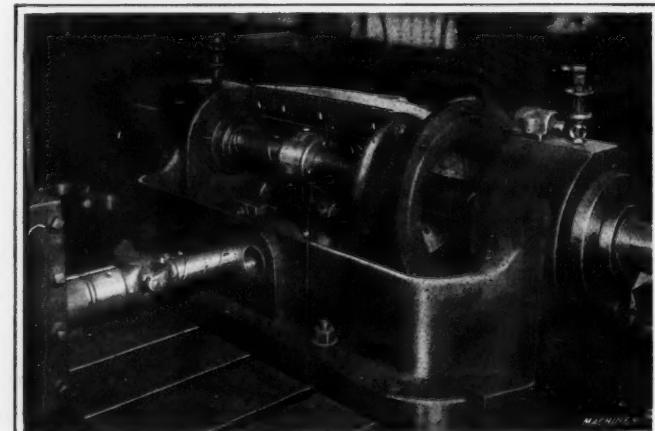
Close View of Work and Tools on Machines shown in Fig. 4
